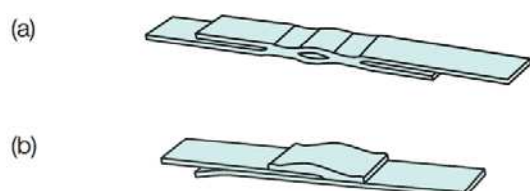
(a) Fusion Weld; (b) Extrusion Weld (Darilek, 2012)
